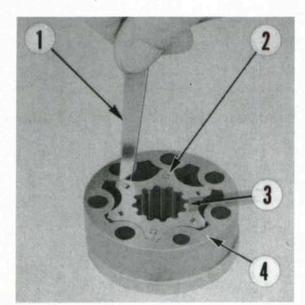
Use a feeler gage (1) to measure clearance between tips of rotor (3) and stator (4).
